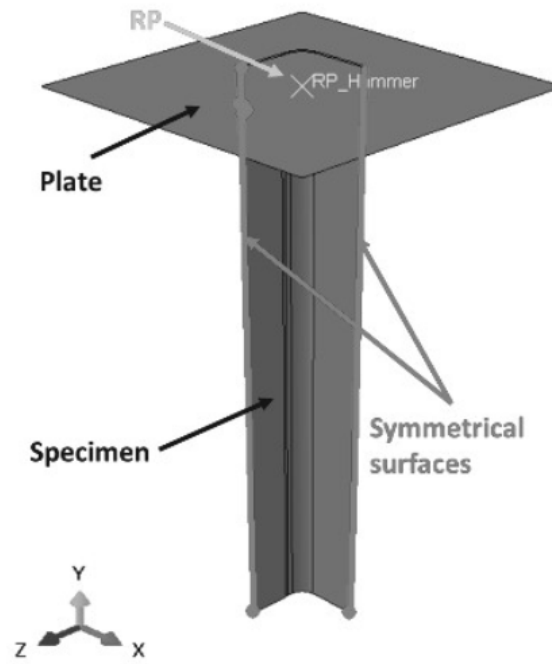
Crash box and steel plate assembly (one-quarter)
